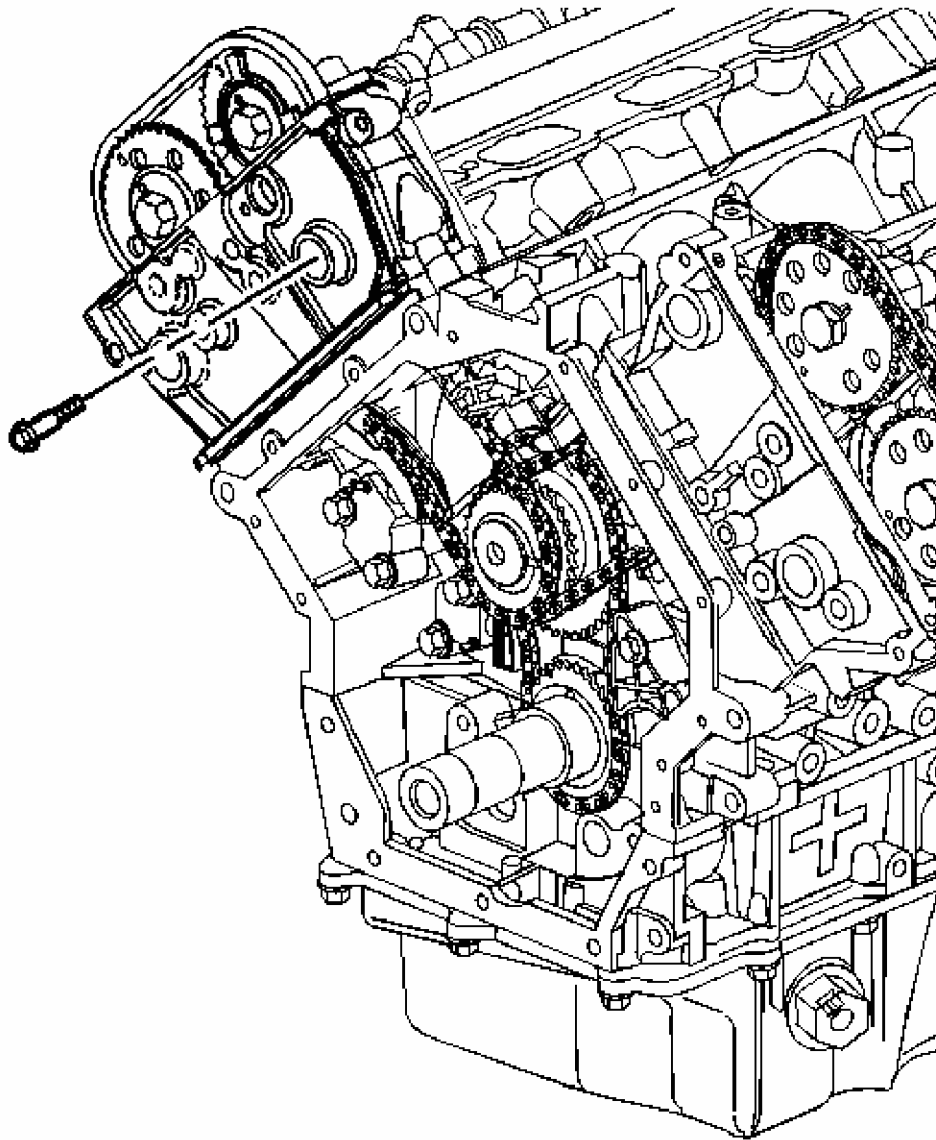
View Of Upper Right Secondary Camshaft Drive Chain Guide Bolt
